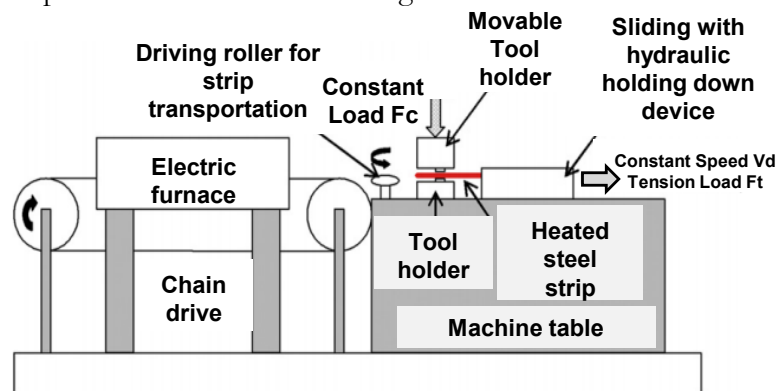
Schematic representation of hot strip drawing simulator. Adapted from [72].
